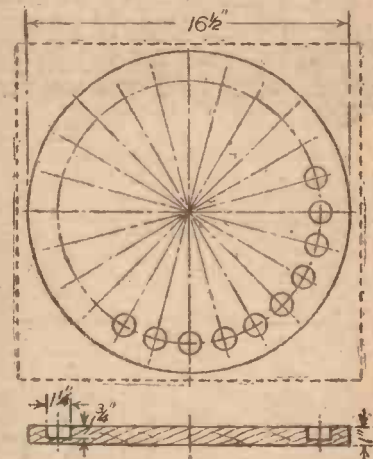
Method of marking out the wheel, and the holes for the lead weights.
